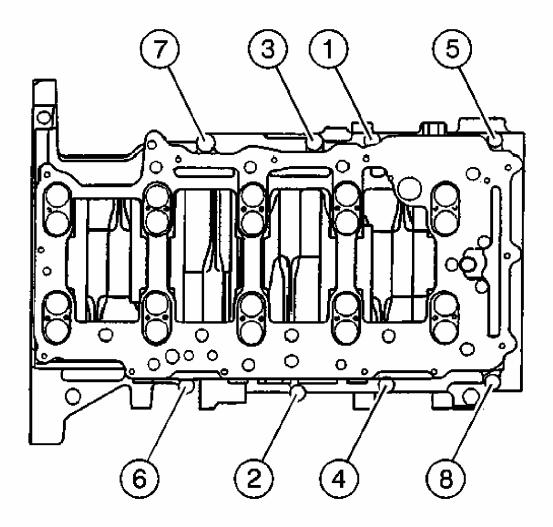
Identifying Upper-To-Lower Crankcase Perimeter Bolts Tightening Sequence
